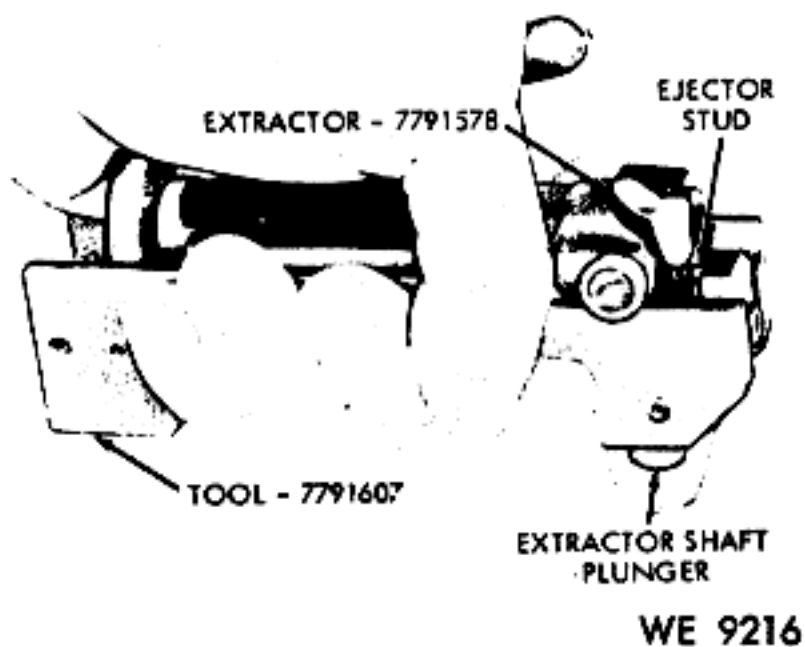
Bolt disassembly using bolt assembly and disassembly tool 7791607.
